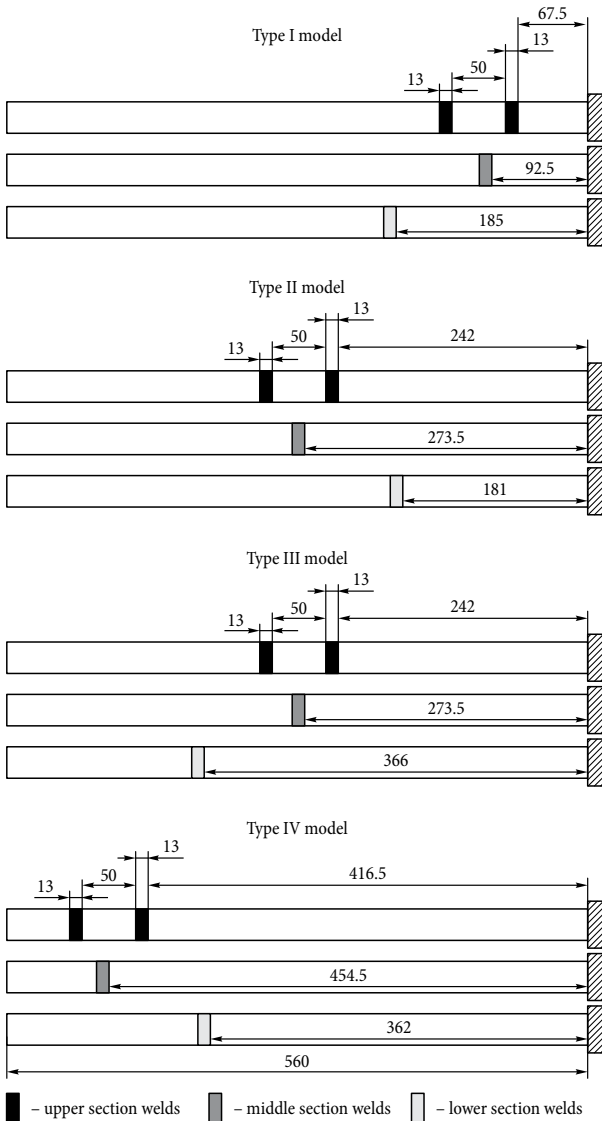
Weld location options (Dzerkelis et al. 2012b)
